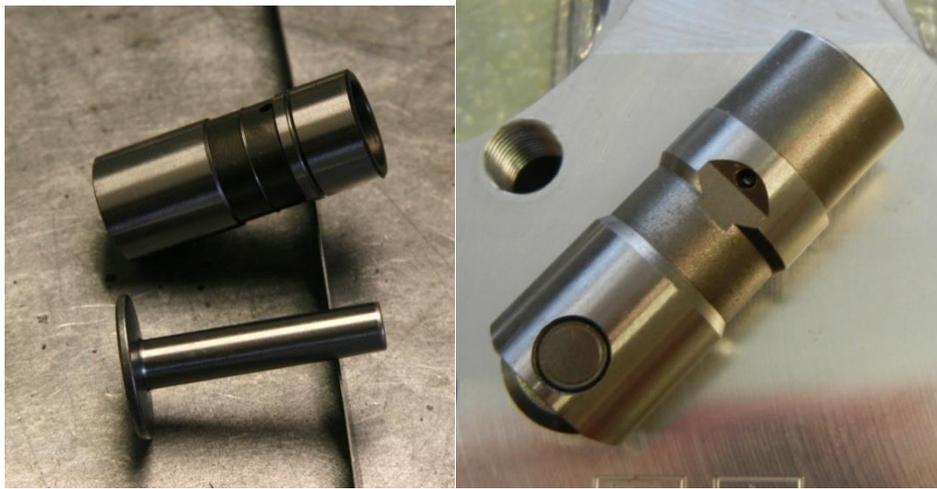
Hydraulic Lifter (top left), Solid Lifter (lower left), Roller Follower (right)
